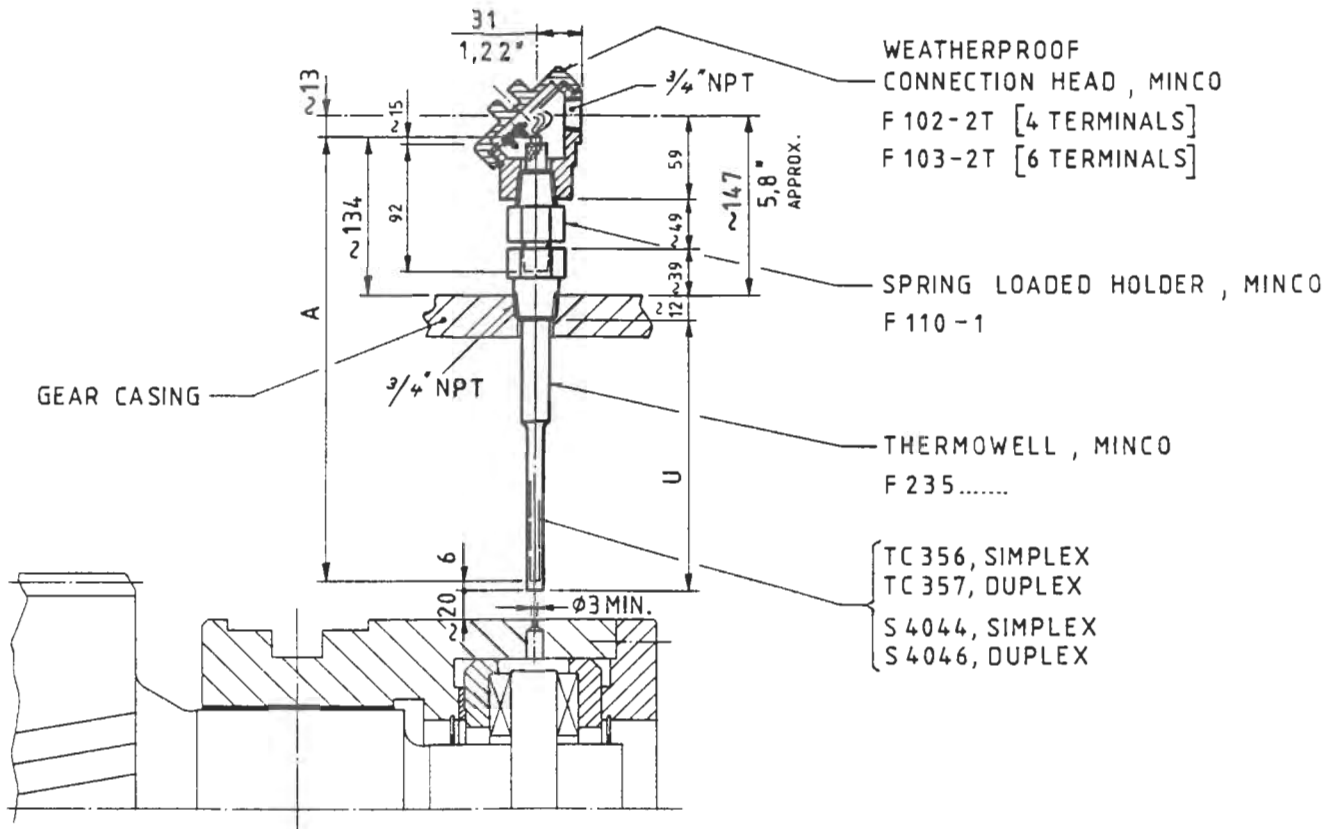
Technical details of instruments for axial bearings mounted from outside of the casing
